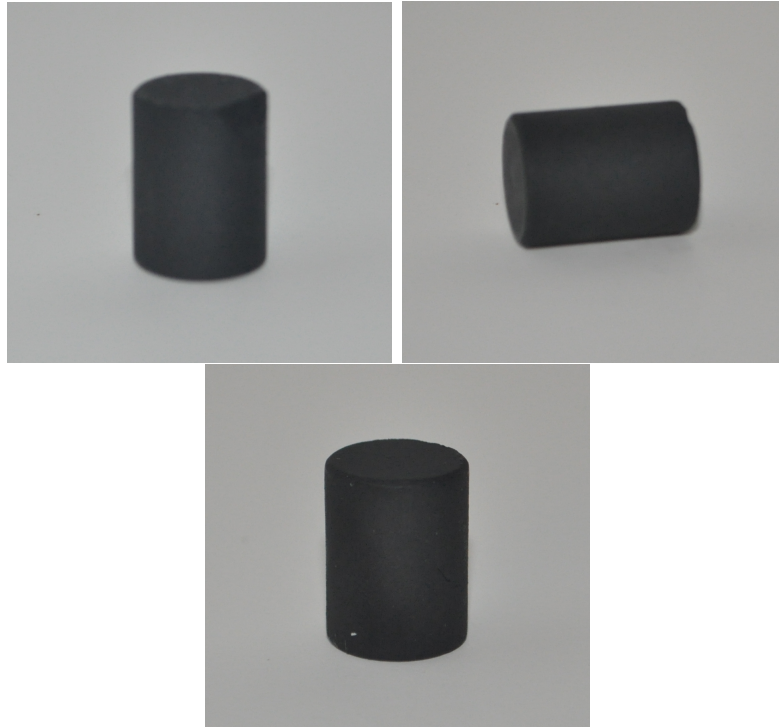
Pseudo Test Pellets with “End-Chip” Defects: Pellet 1 (Upper Left), Pellet 2 (Upper Right), Pellet 3 (Bottom)
